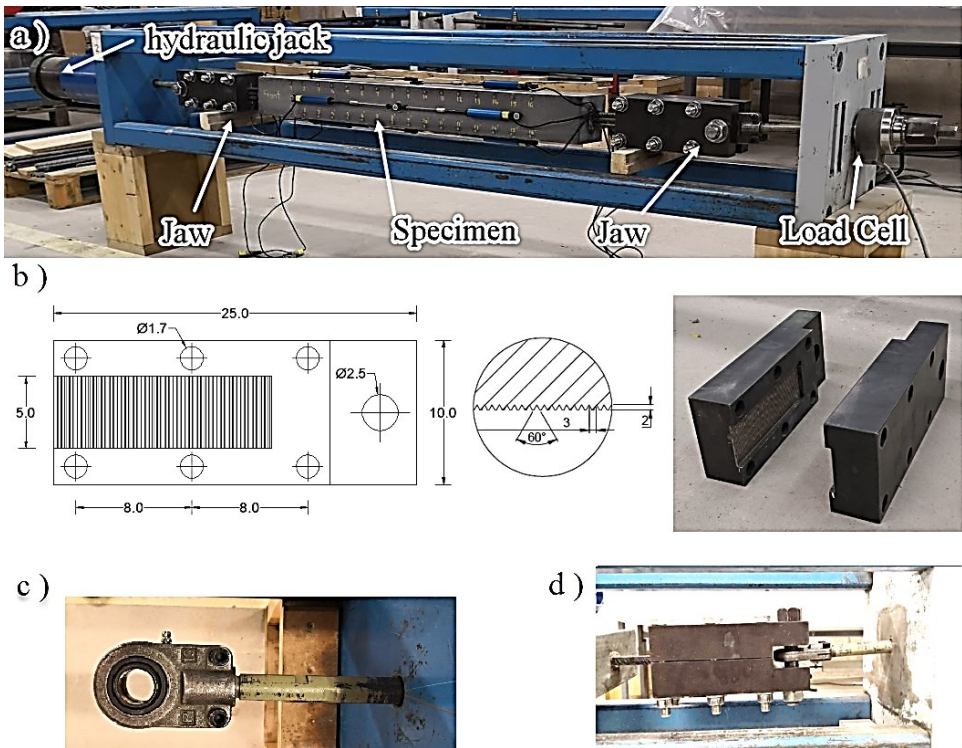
a) Tensile test equipment. b) Jaw details. c) rod end bearing. d) assembled Jaw connection.
